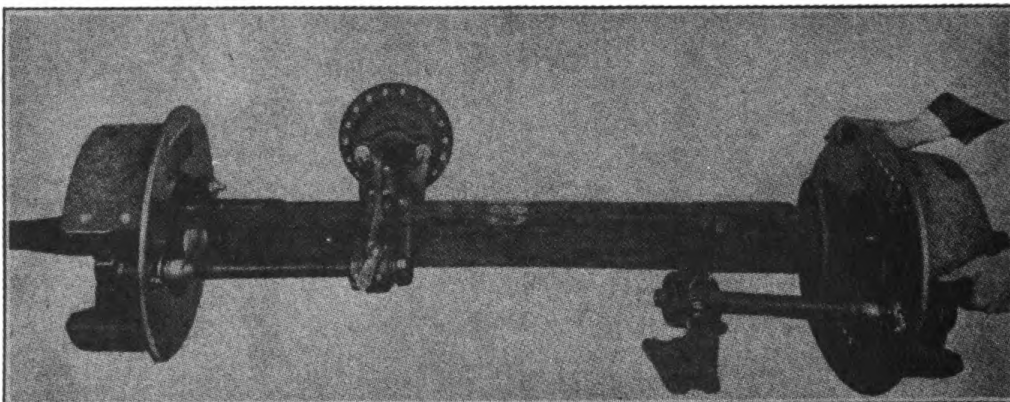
REMOVING BRAKE ASSEMBLIES
